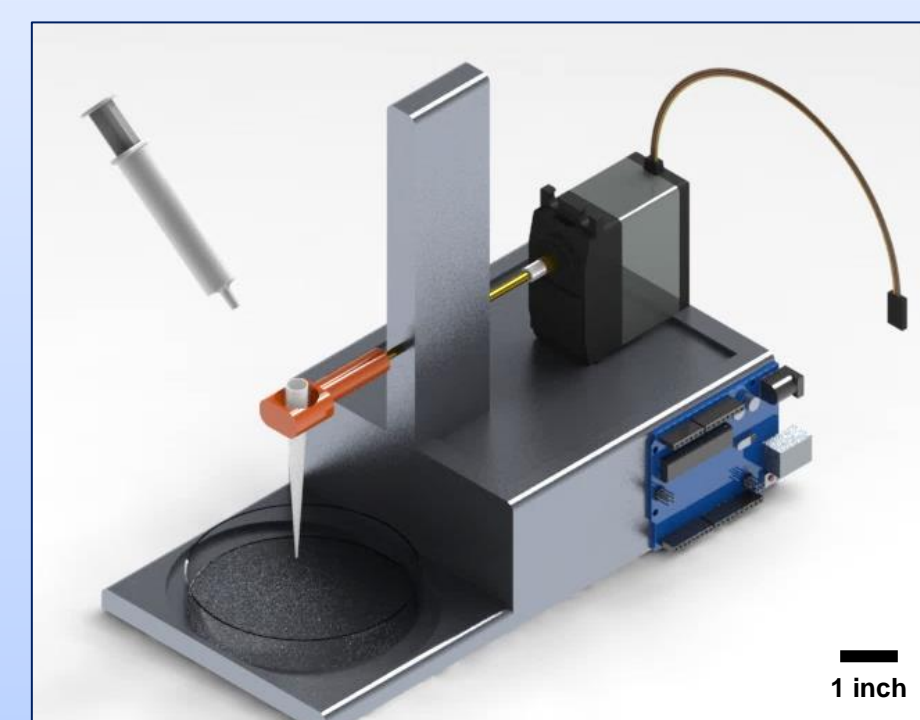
Solidworks CAD model of proposed system. The base is planned to be machined out of aluminum and it will feature both 3D printed parts and stock materials.
